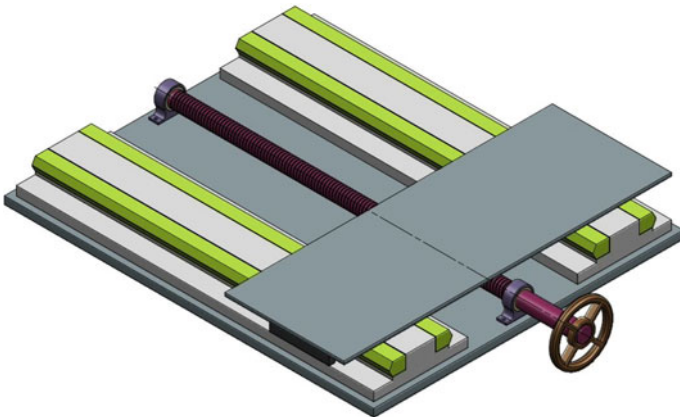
System for providing sideways movement of welding torch assembly
